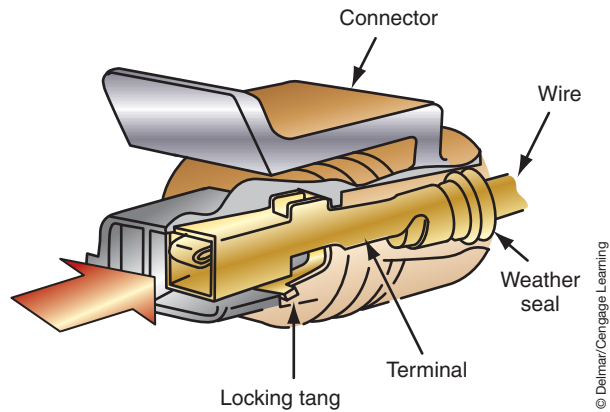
Make sure that the terminal locks into the connector body.
